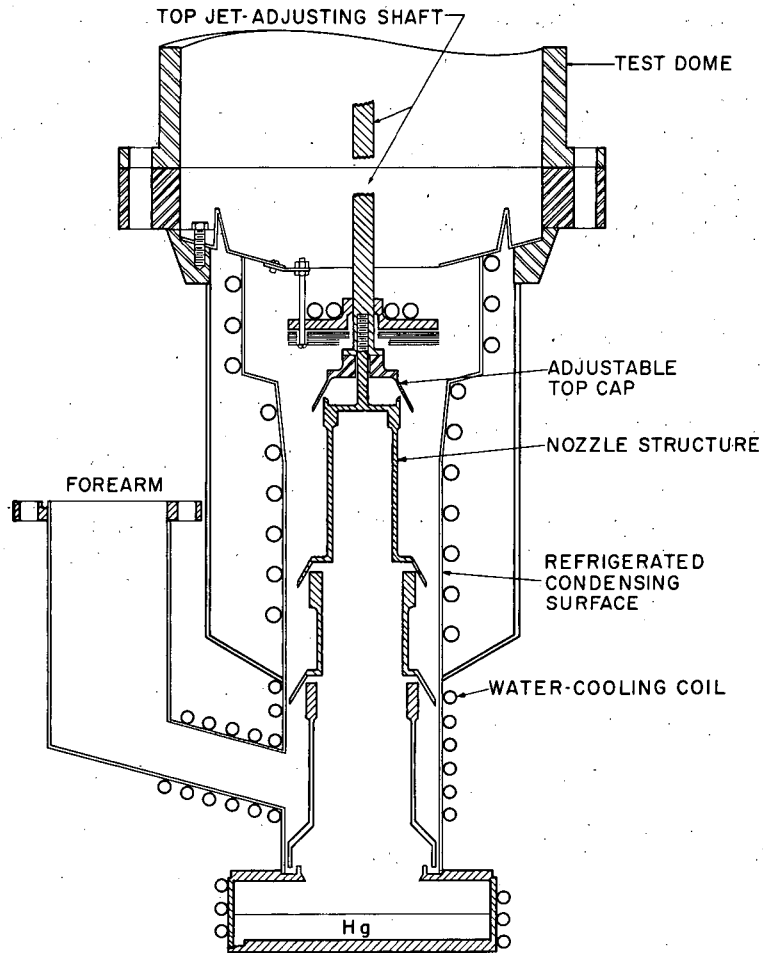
Jet assembly for ultrahigh-vacuum pump.
